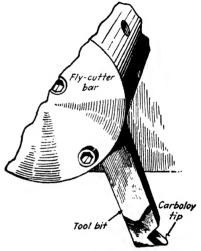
One blade of a fly cutter for supercharger impellers.
